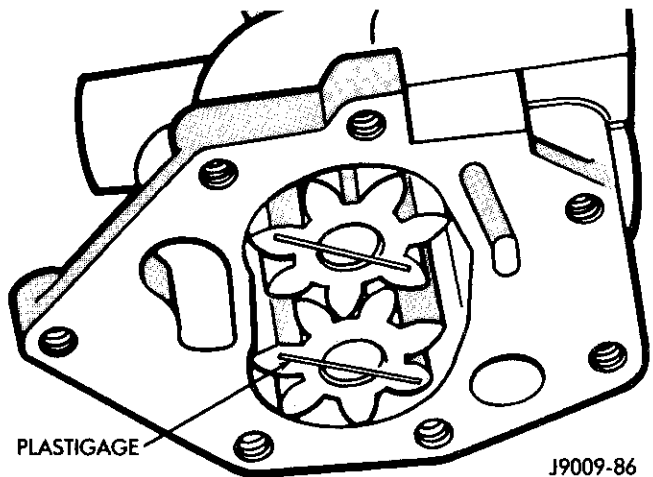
Oil Pump Gear End Clearance Measurement - Plastigage Method
